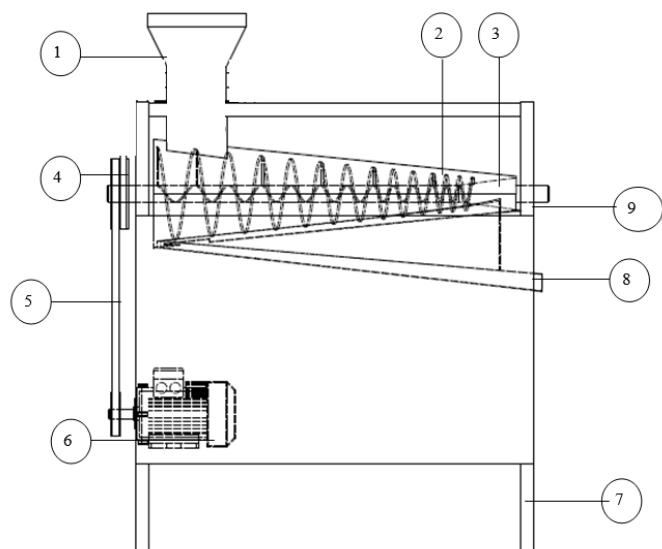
The experimental machine components. (1) Hopper, (2) compression barrel, (3) kink, (4) pulley, (5) belt, (6) electric motor, (7) frame, (8) juice chute, (9) leaf mash chute.
